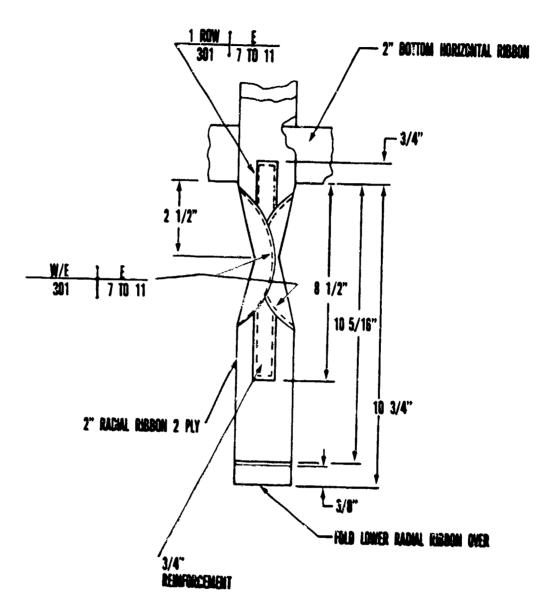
Radial to Suspension Line Joint Becket and Reinforcement Detail
